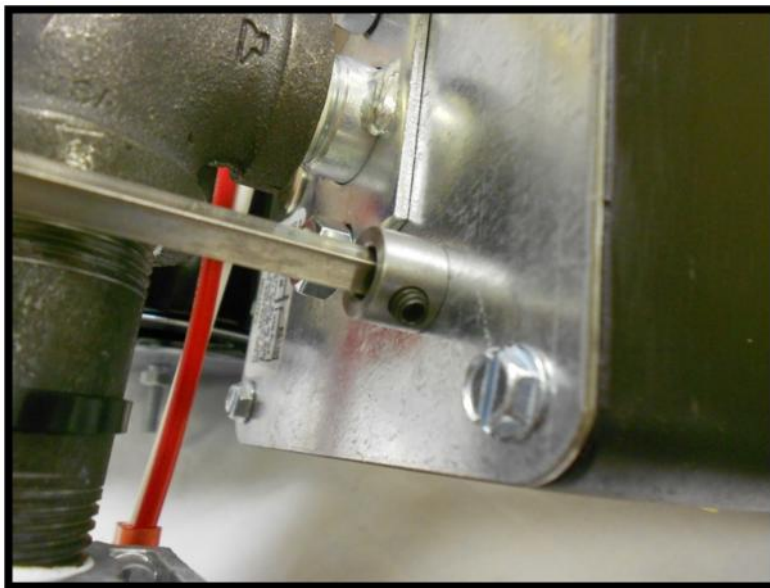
FLAME SPREADER SET SCREW LOCATION
